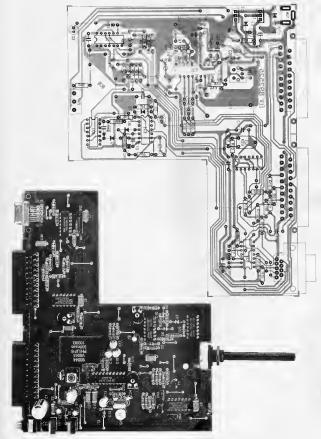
Component mounting plan and top view of the printed-circuit board for the RGB-to-CVBS converter.
